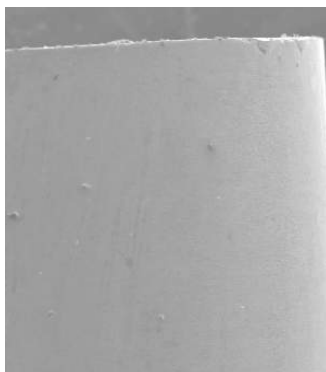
Part of front and side surface of a new stamp (enlarged 35×)
